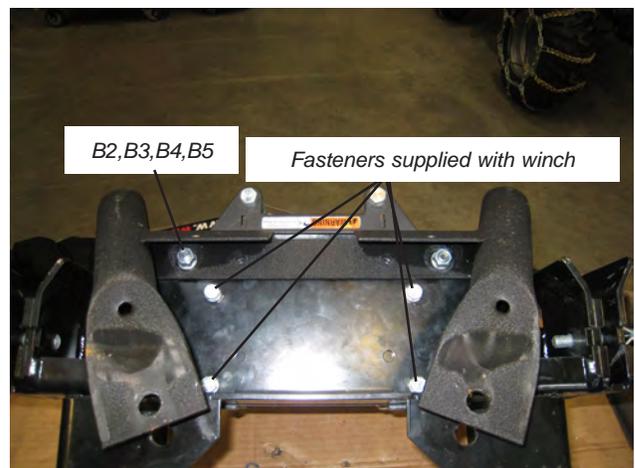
Install Front Fasteners - Bottom view of plow mount assembled to bumper
